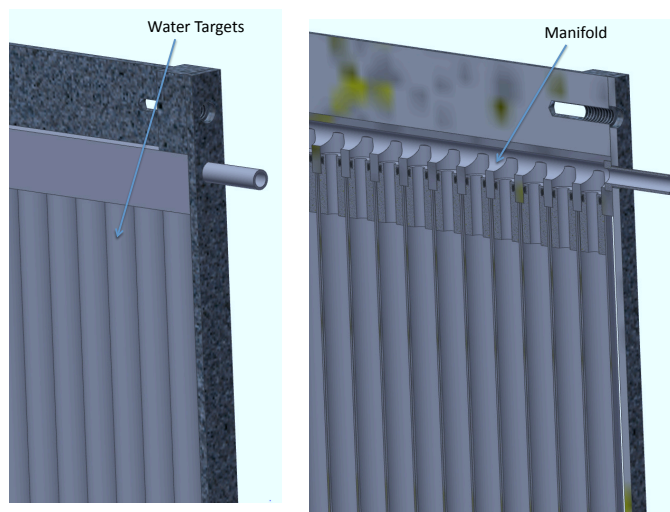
Schematic drawing of the water or pressurized-argon targets, made from 0.5-in diameter aluminum tubes
